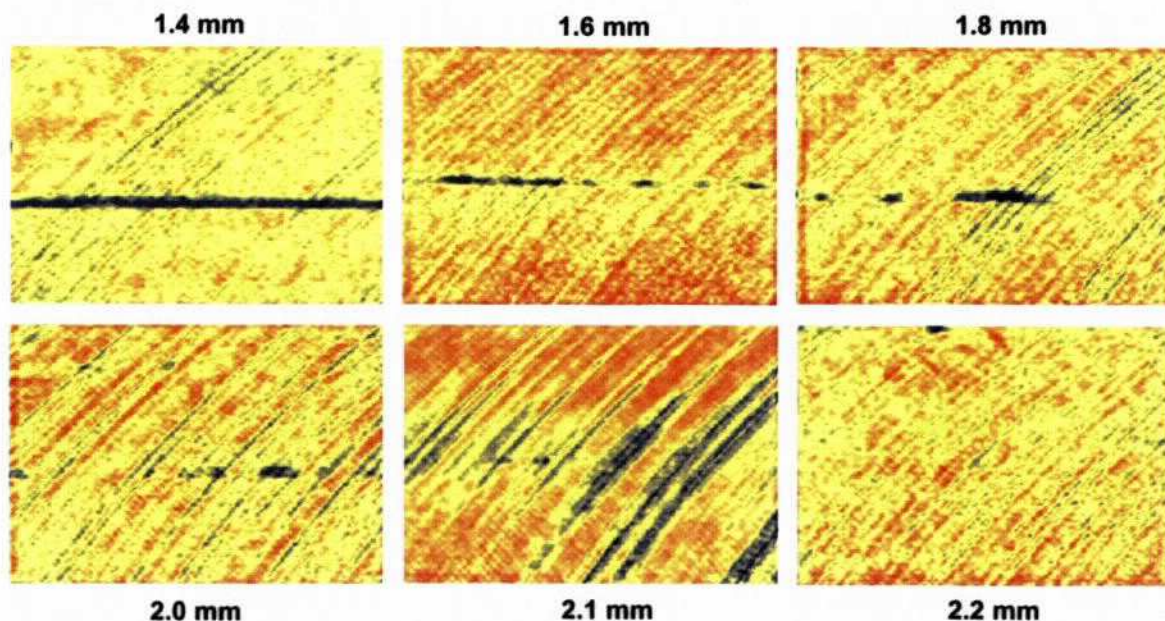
SAFT images of the bottom surface for different pin penetrations as indicated along the weld.
